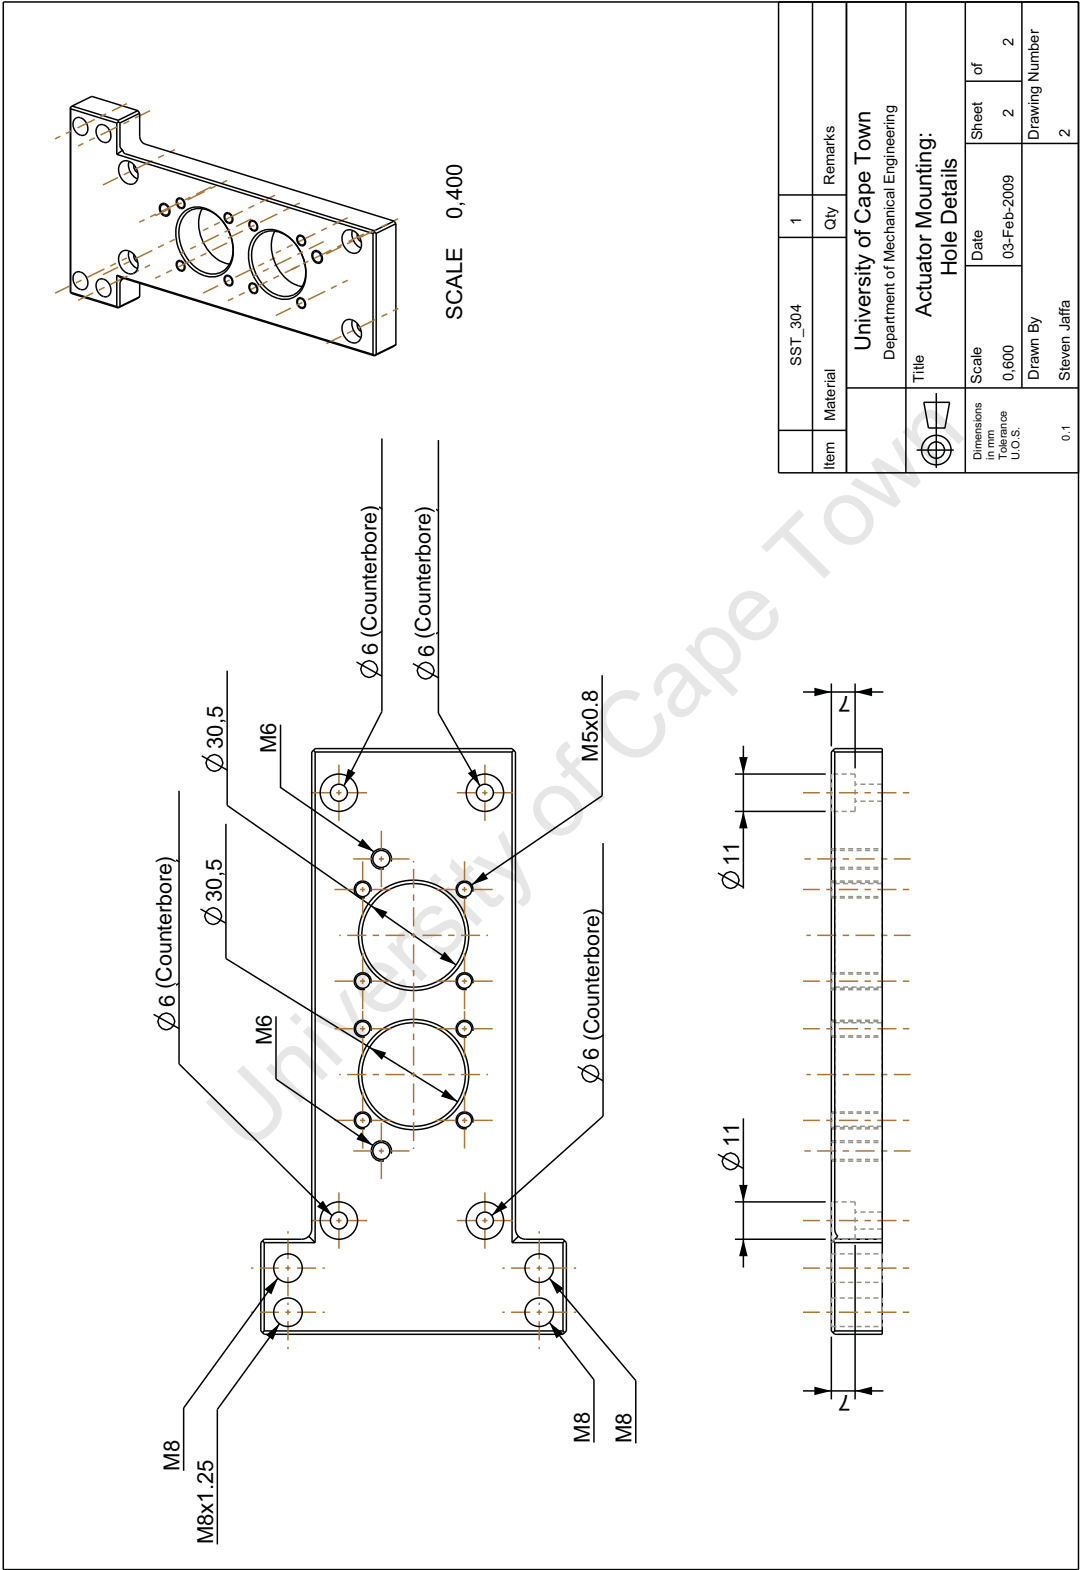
Manufacturing Drawing: Actuator Mounting Drawing 2 – Hole Dimensions.
